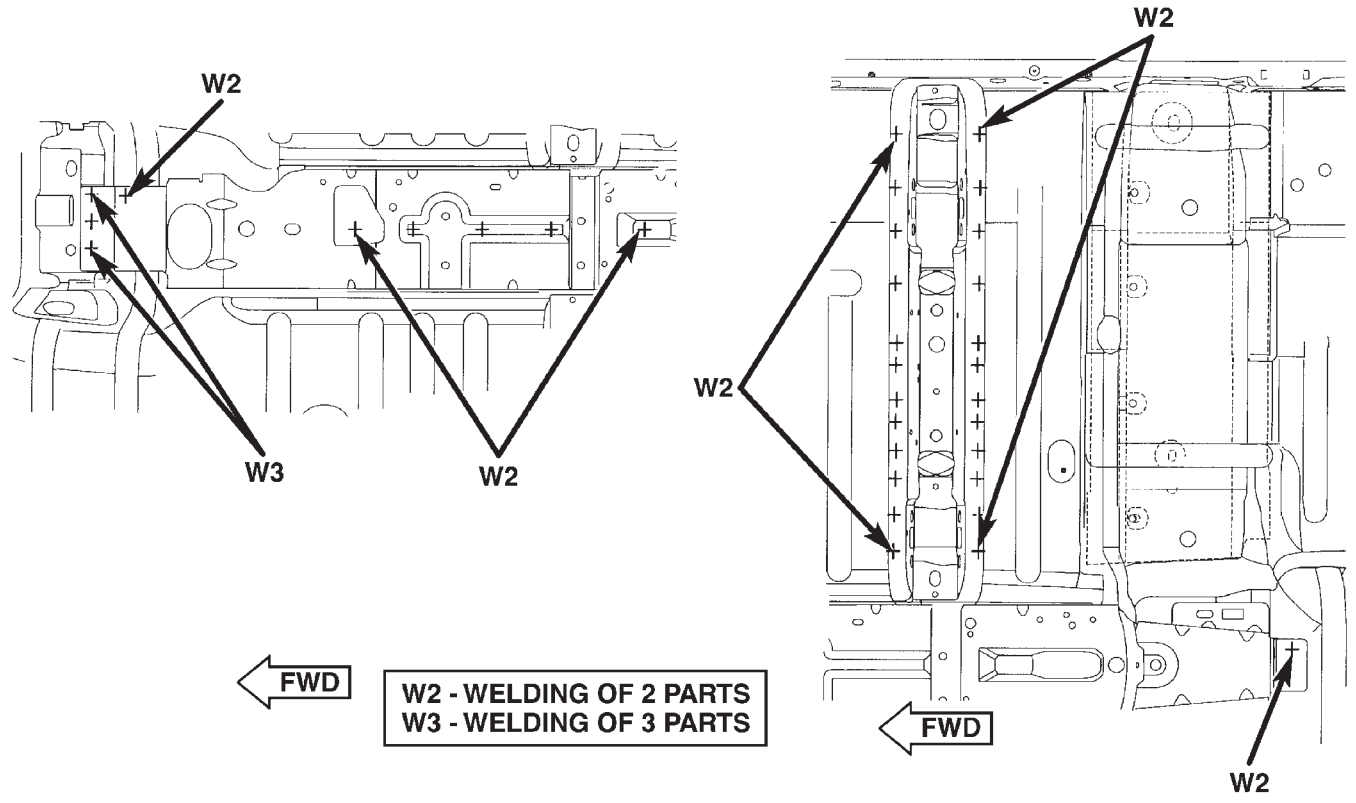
FRONT CONSOLE BRACKET TO FRONT FLOOR PAN
